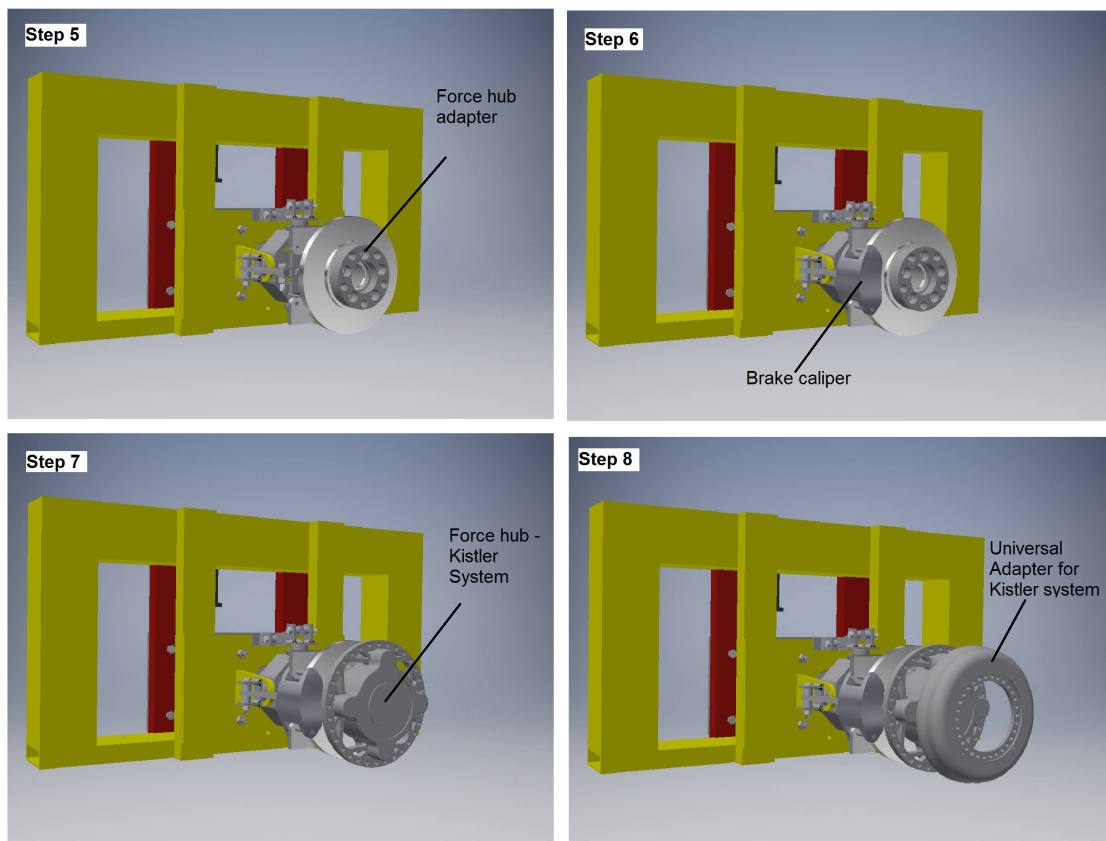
Procedure for brake system assembly - Step5 to Step8.
